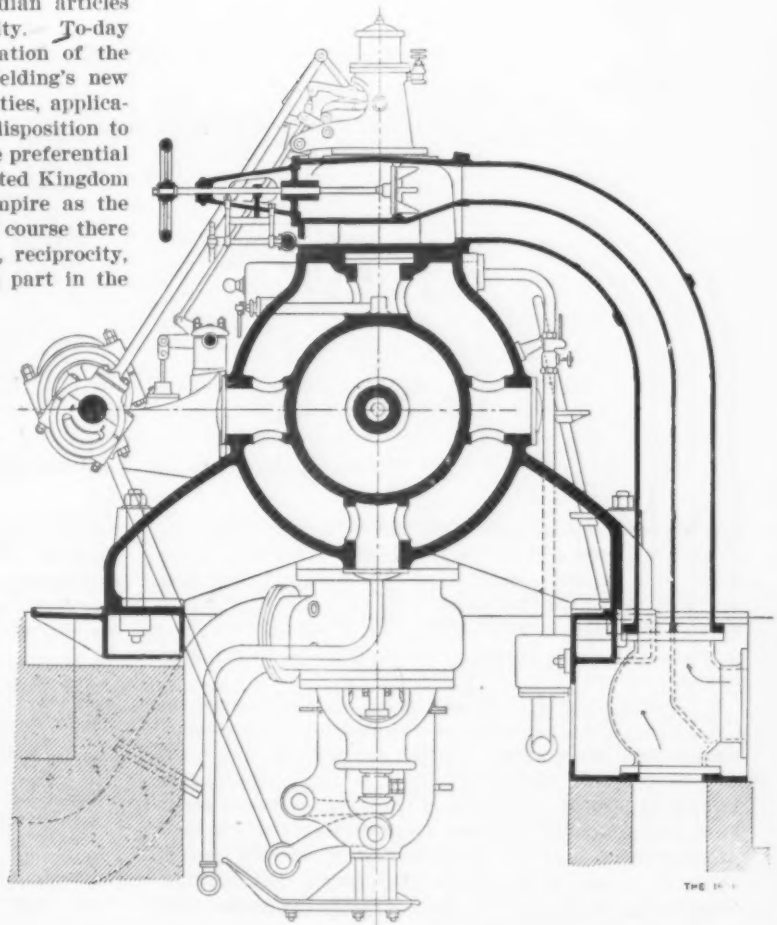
Valve Mechanism and Section of Cylinder of the Four-Cycle Gas Engine.
